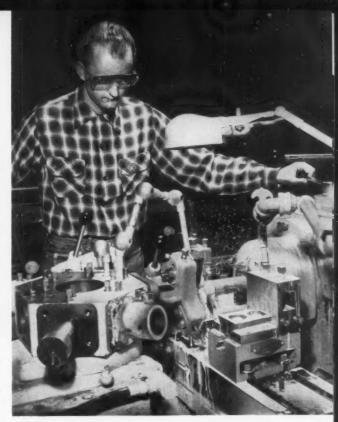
A 3/4-16 steel bolt is being completely machined from 1 3/8-inch diameter bar stock in less than sixty seconds. A body-diameter tolerance of plus or minus 0.001 inch is maintained.
